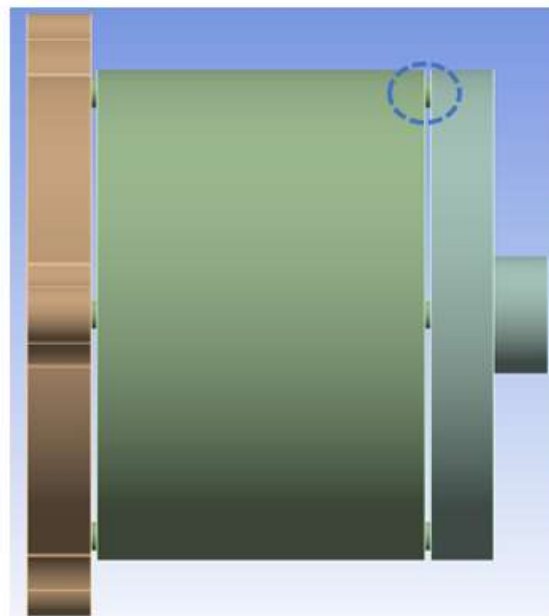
Bolts contacts used in mechanical modelling of connections for SRM assemblies
